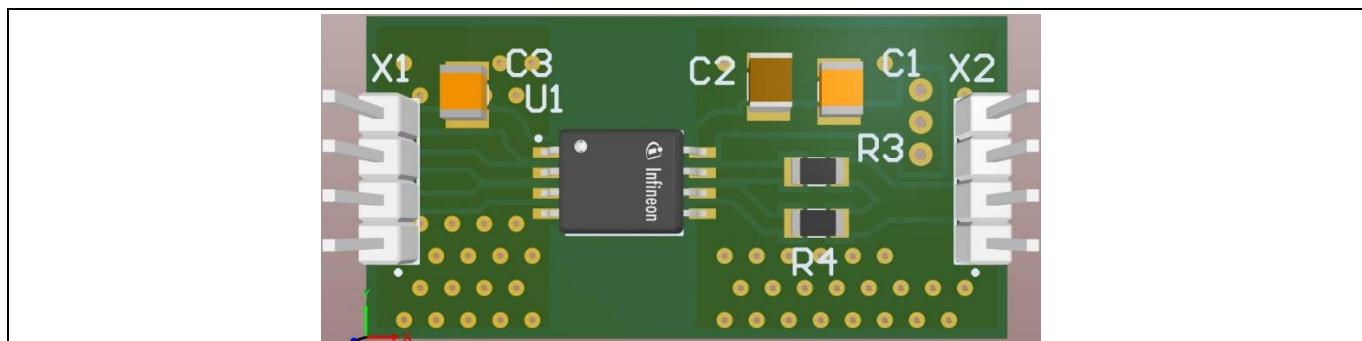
3D PCB view for CT gate driver design with 1ED3124MC12H (X3 Compact)
